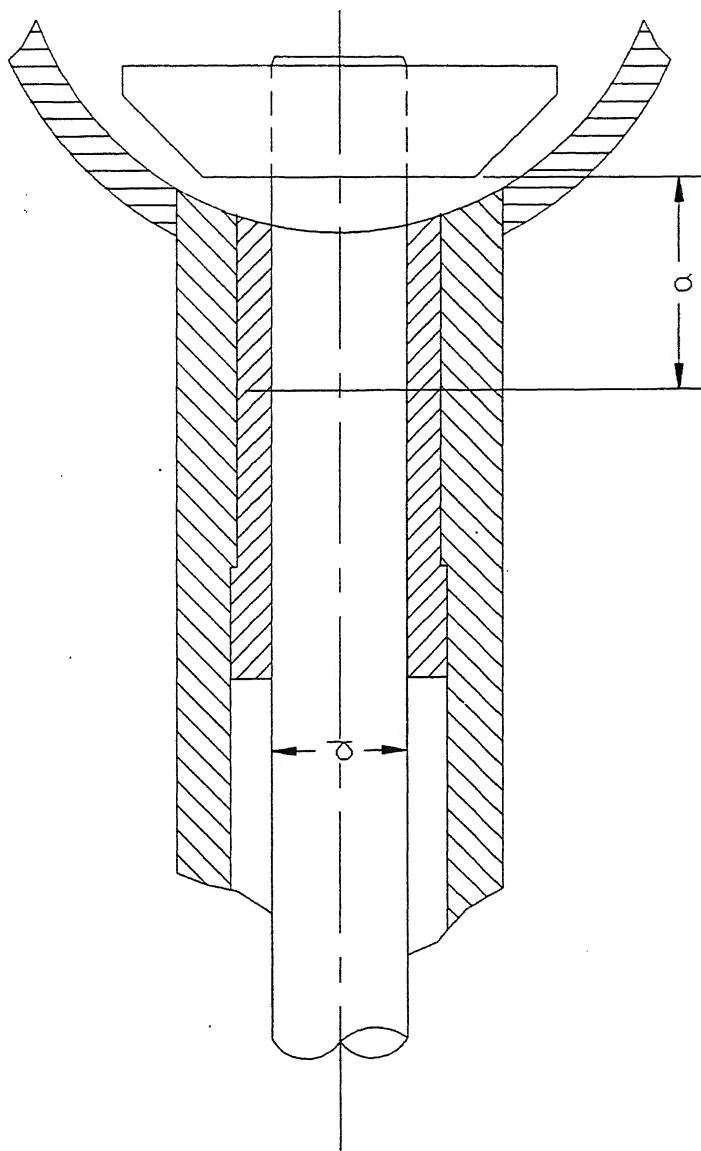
Sectional view of butterfly valve shaft and bearing.
